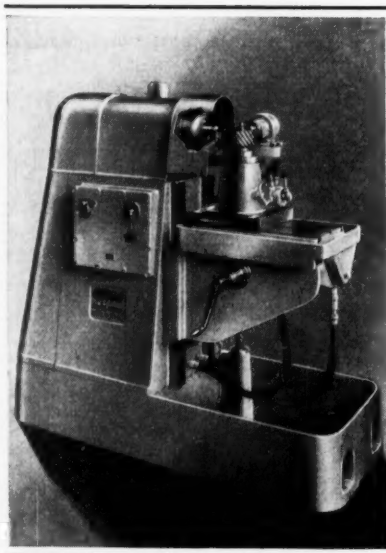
Cross Fully Hydraulic Gear-tooth Rounder
